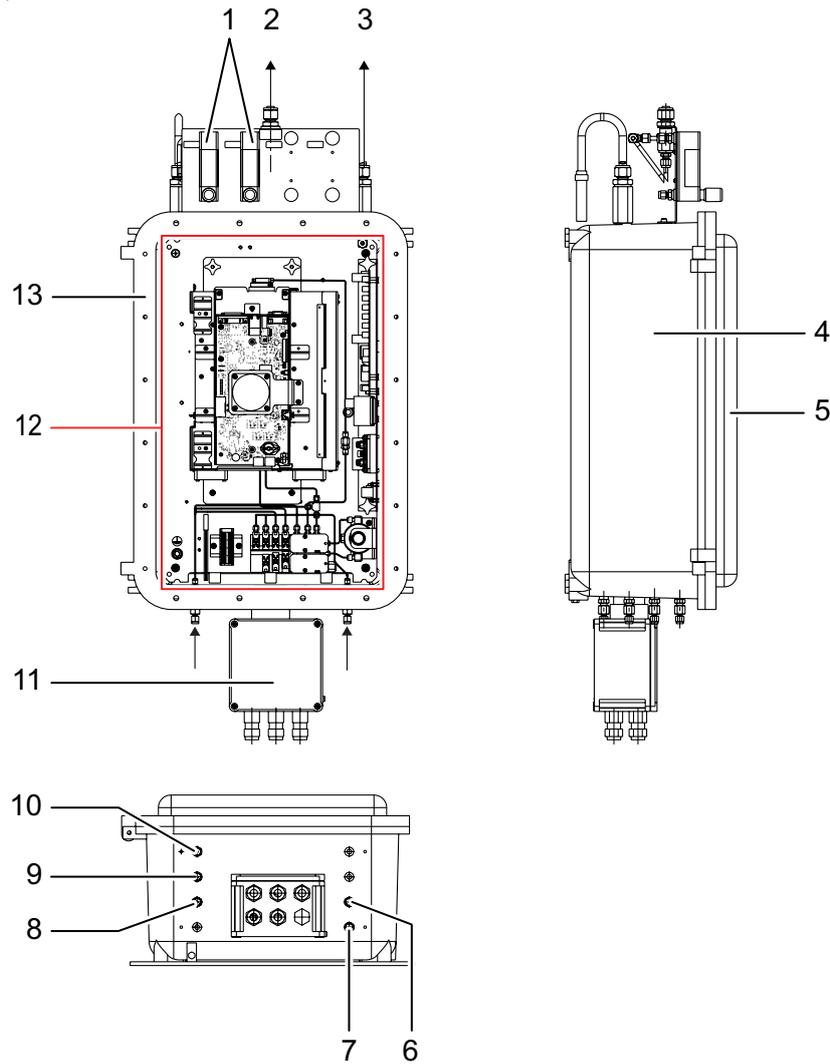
PGC 9301 with housing for wall-mounted assembly
